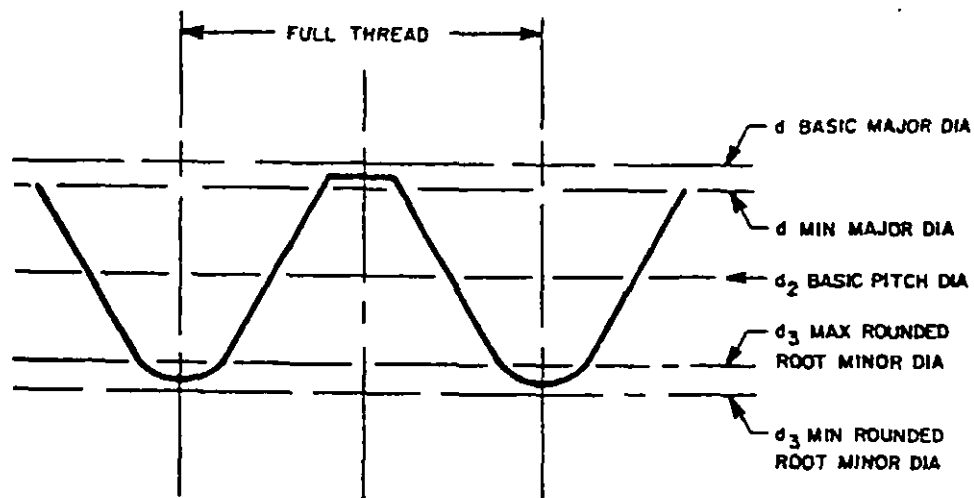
COMPLETELY FORMED EXTERNAL THREAD
